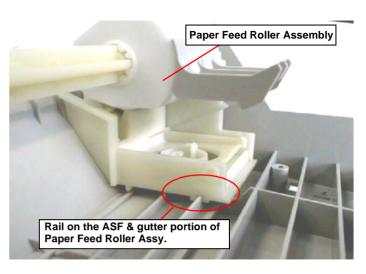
Setting the Paper Feed Roller Assembly on the Rail
